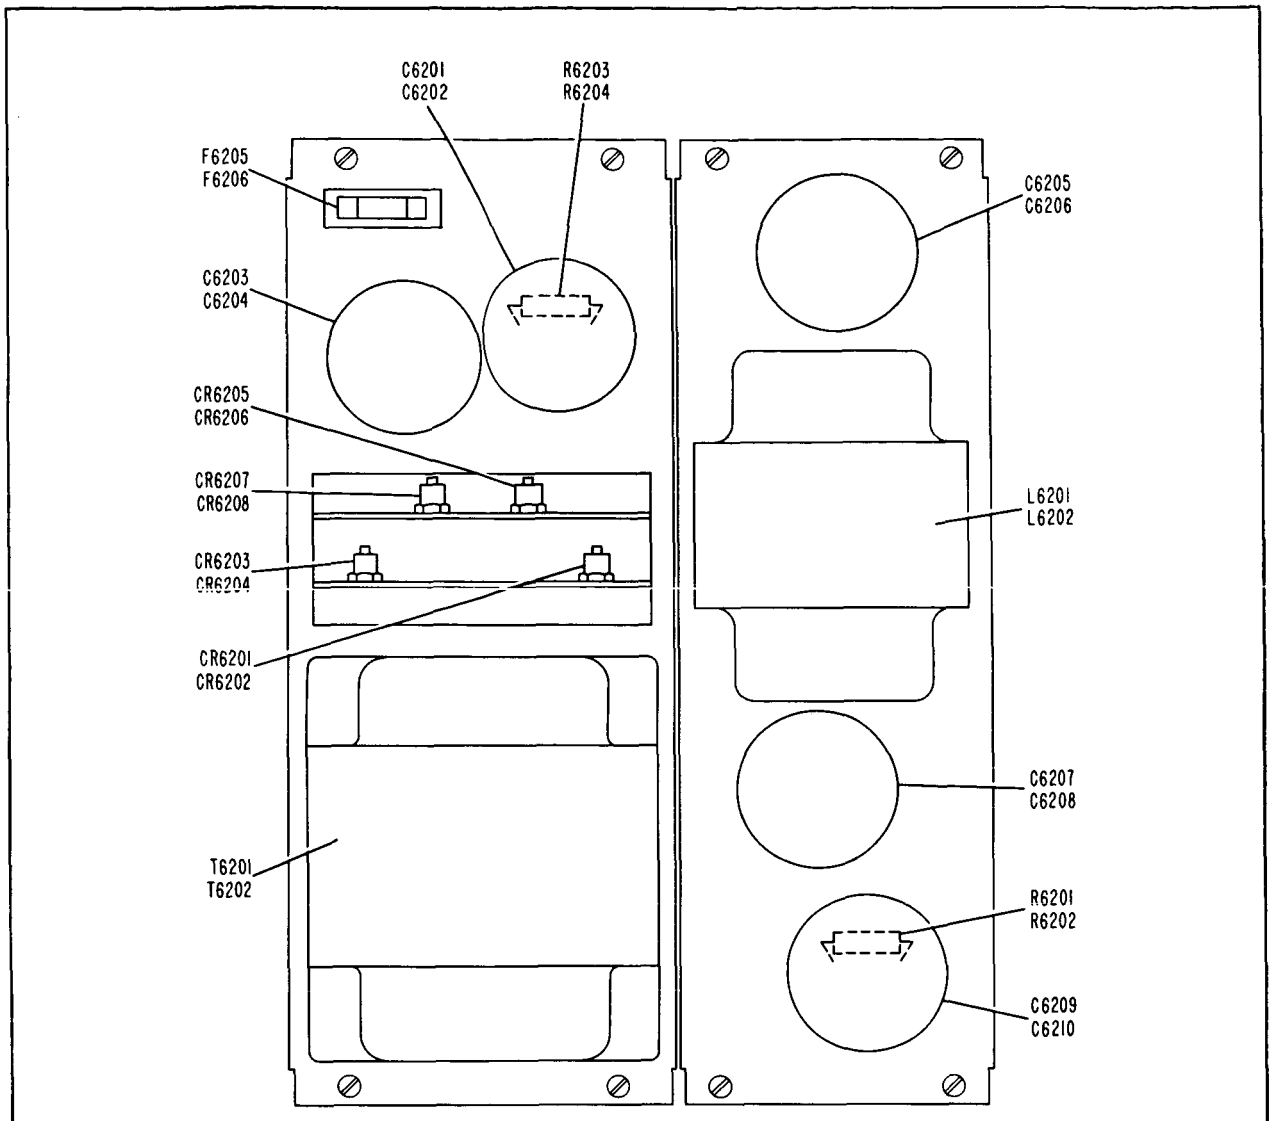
Power Supply Unit and Filter Unit, Parts Location
